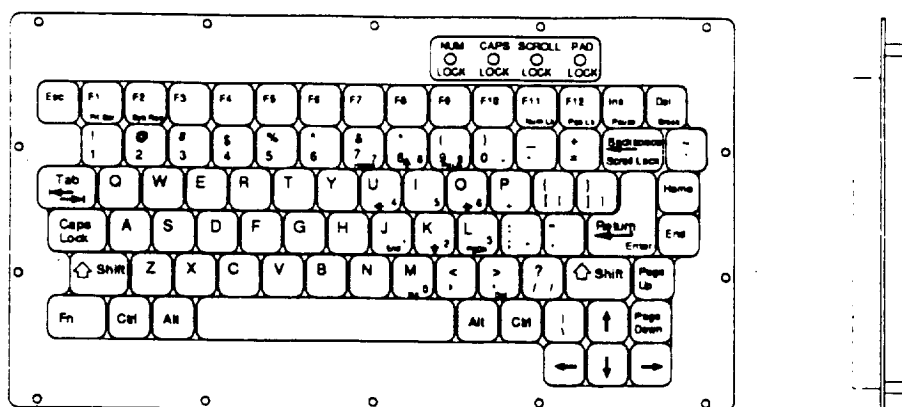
APW II Keyboard Assembly (65442-1)
